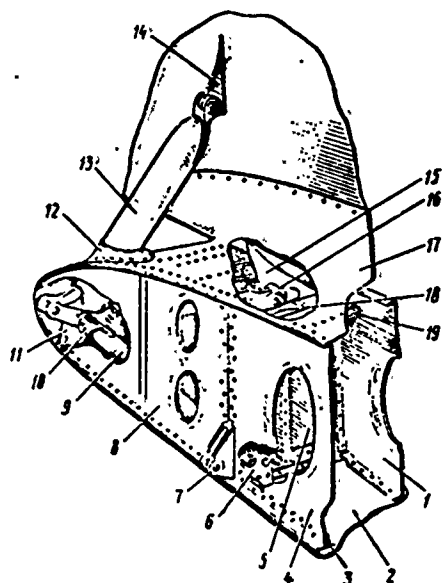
Truss of wing center section: 1 - middle of rib No. 1; 2 - skin of wing center part of the fuselage; 3 - angle bar of middle of rib No. 2; 4 - wall of the middle of rib No. 2; 5 - bottom part of frame No. 6 (front spar of wing center section); 6 - fitting; 7 - attachment point of lower wing; 8 - leading edge of rib No. 2; 9 - transverse tubular strut; 10 - forked bolt with lubricating screw; 11 - universal joint of attachment of the landing gear shock strut; 12 - fairing; 13 - front inclined strut; 14 - side joint of frame No. 5; 15 - bottom joint of frame No. 5; 16 - longitudinal
